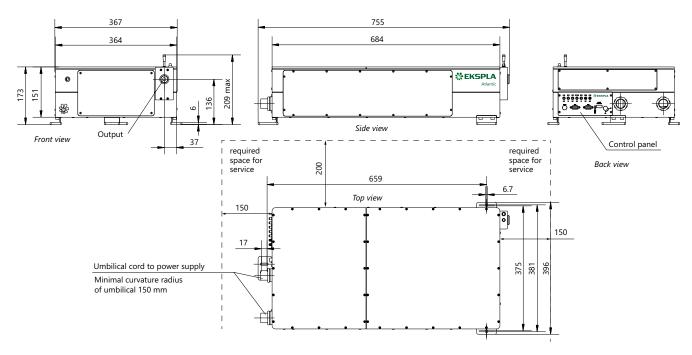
Outline drawings of Atlantic 50, 80 laser head with a single 1064 nm output (dimensions in mm)
